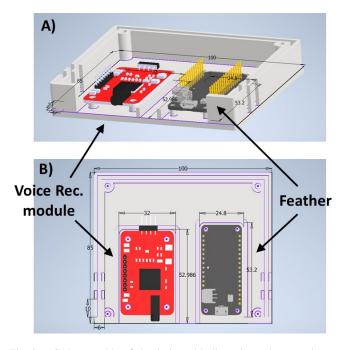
CAD assembly of the device with dimensions (the cover is not depicted on this diagram). A) Isometric view. B) Top view.
